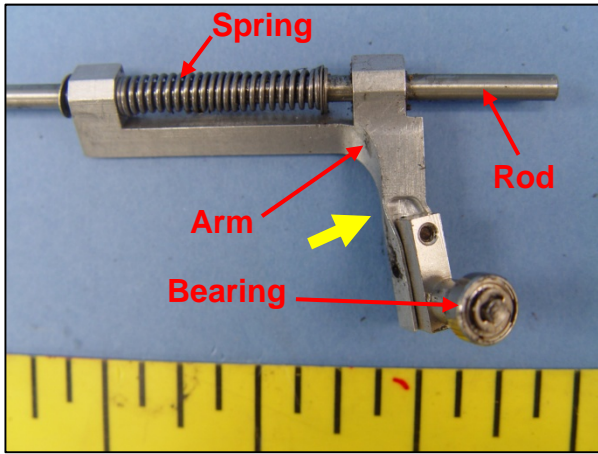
The twisted arm at the rear end of the caging rod assembly.
